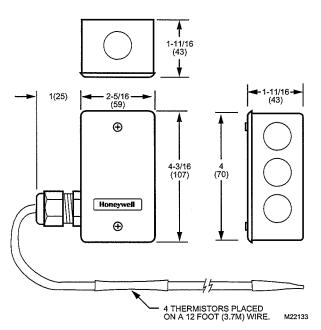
C7021J, C7023J, C7031J, C7041J dimensions in in. (mm).
